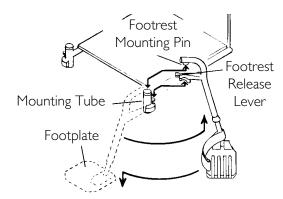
Installing/Removing Footrests - 70° Taper
